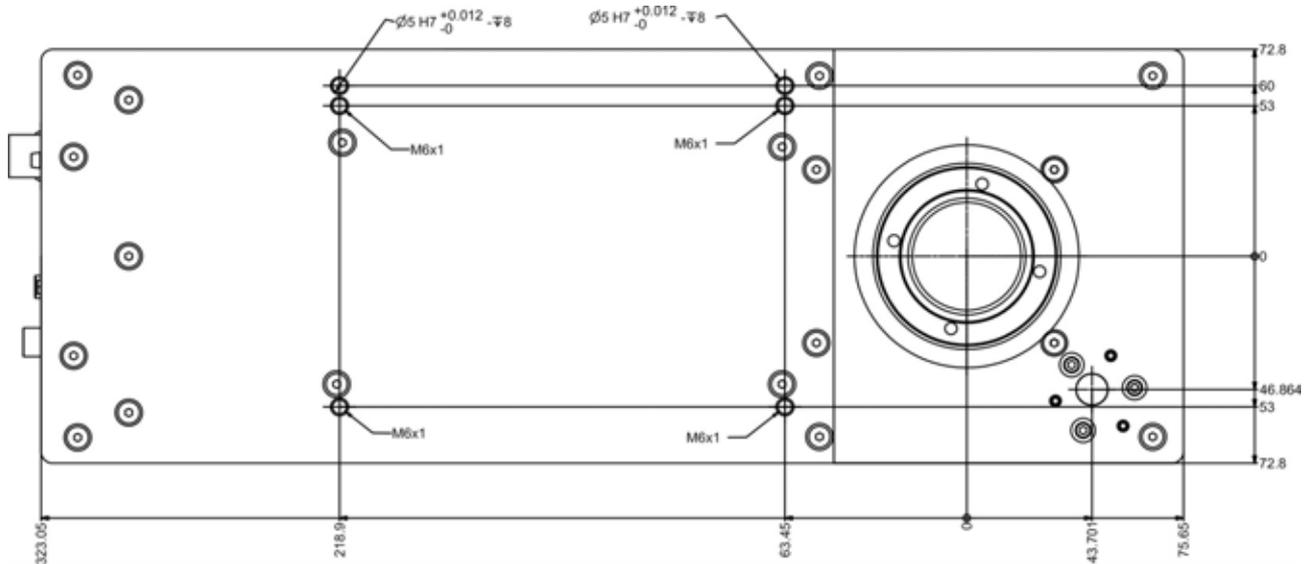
Measures, distance threaded holes and fixing pins drivers.
